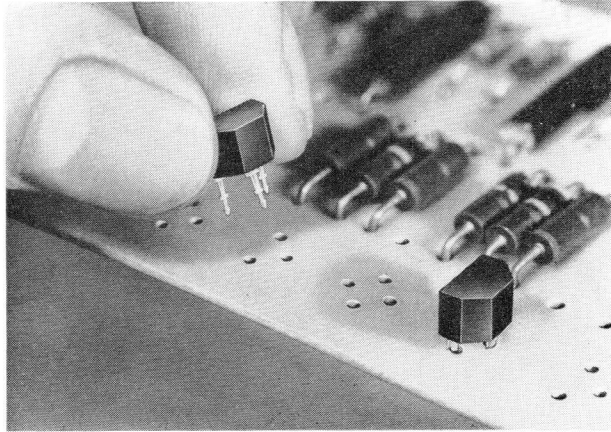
Insertion of Lockfit transistors in printed-wiring board
